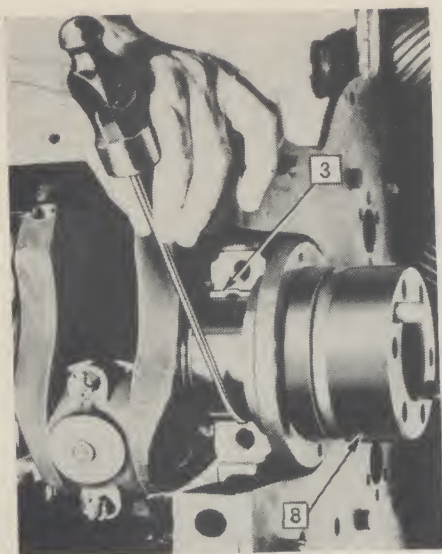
B—A GM engine showing the use of a small diameter rod (3) to remove rear main bearing upper shell (8) when crankshaft is installed.
